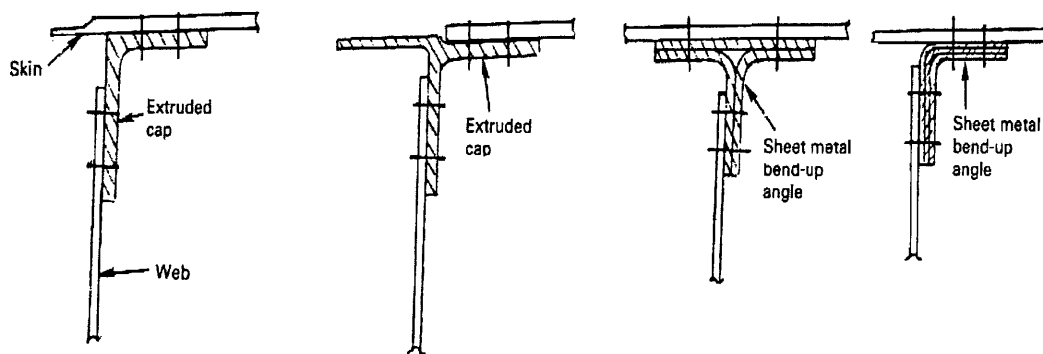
Schematic of Typical Metallic Spar Cap Solutions [63]
